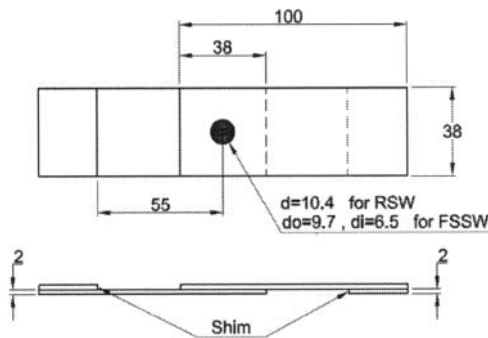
Configuration of friction stir and resistant spot welds single-weld lap-shear coupons. Dimensions are in mm.
